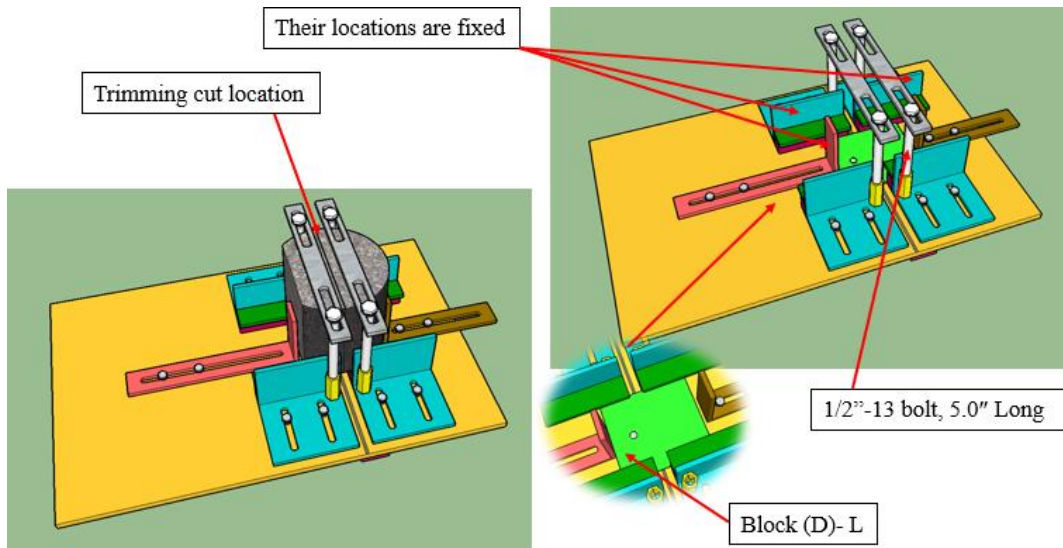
Illustration drawings to the second trim of RV specimens.
